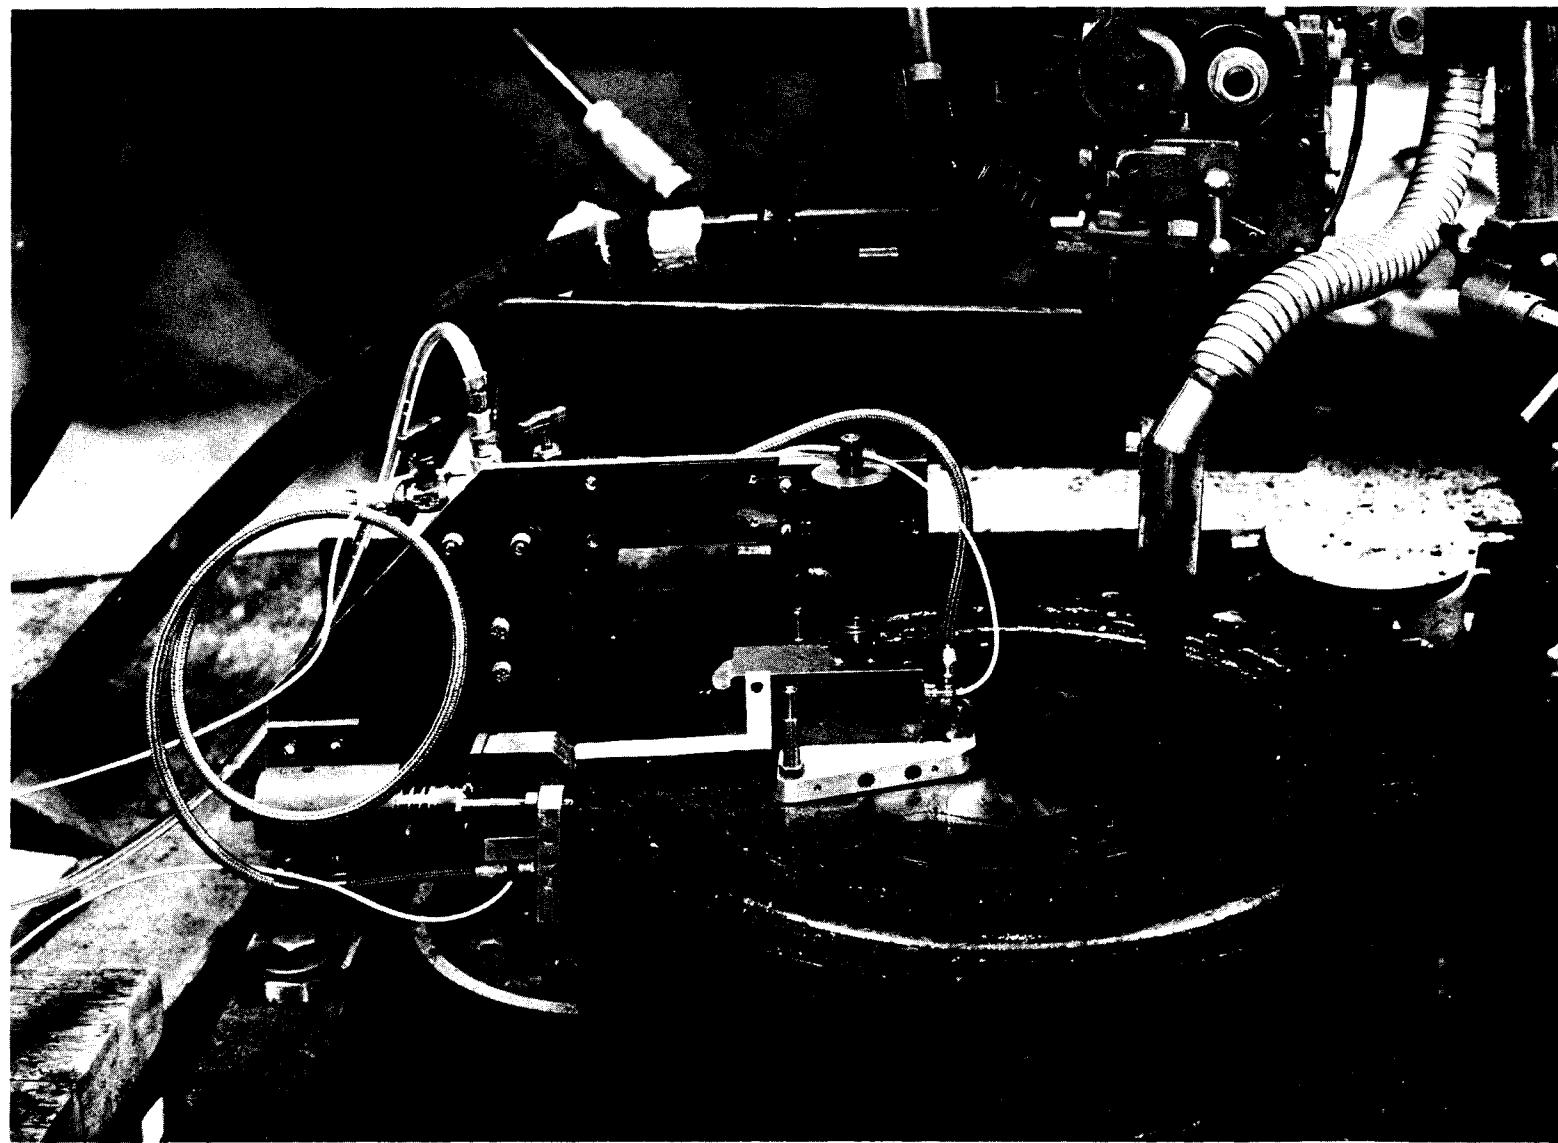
Mechanical Fixture Positioned for Inspection
